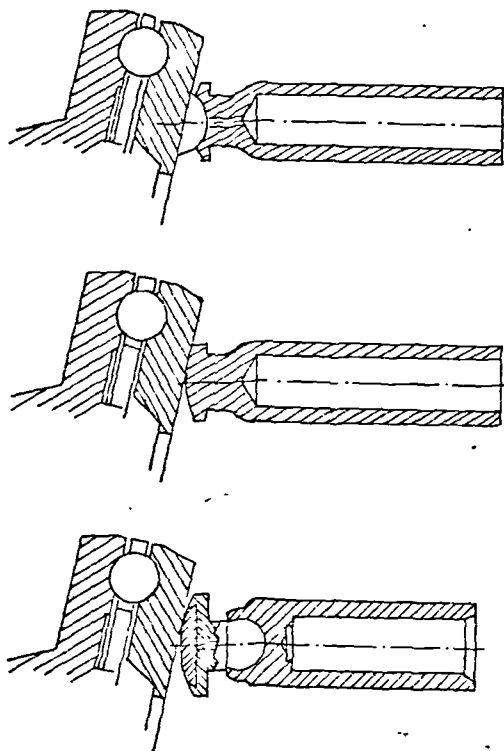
TRANSFERENCE OF THRUST FROM PISTON TO SWASHPLATE USING ROLLER BEARINGS.
